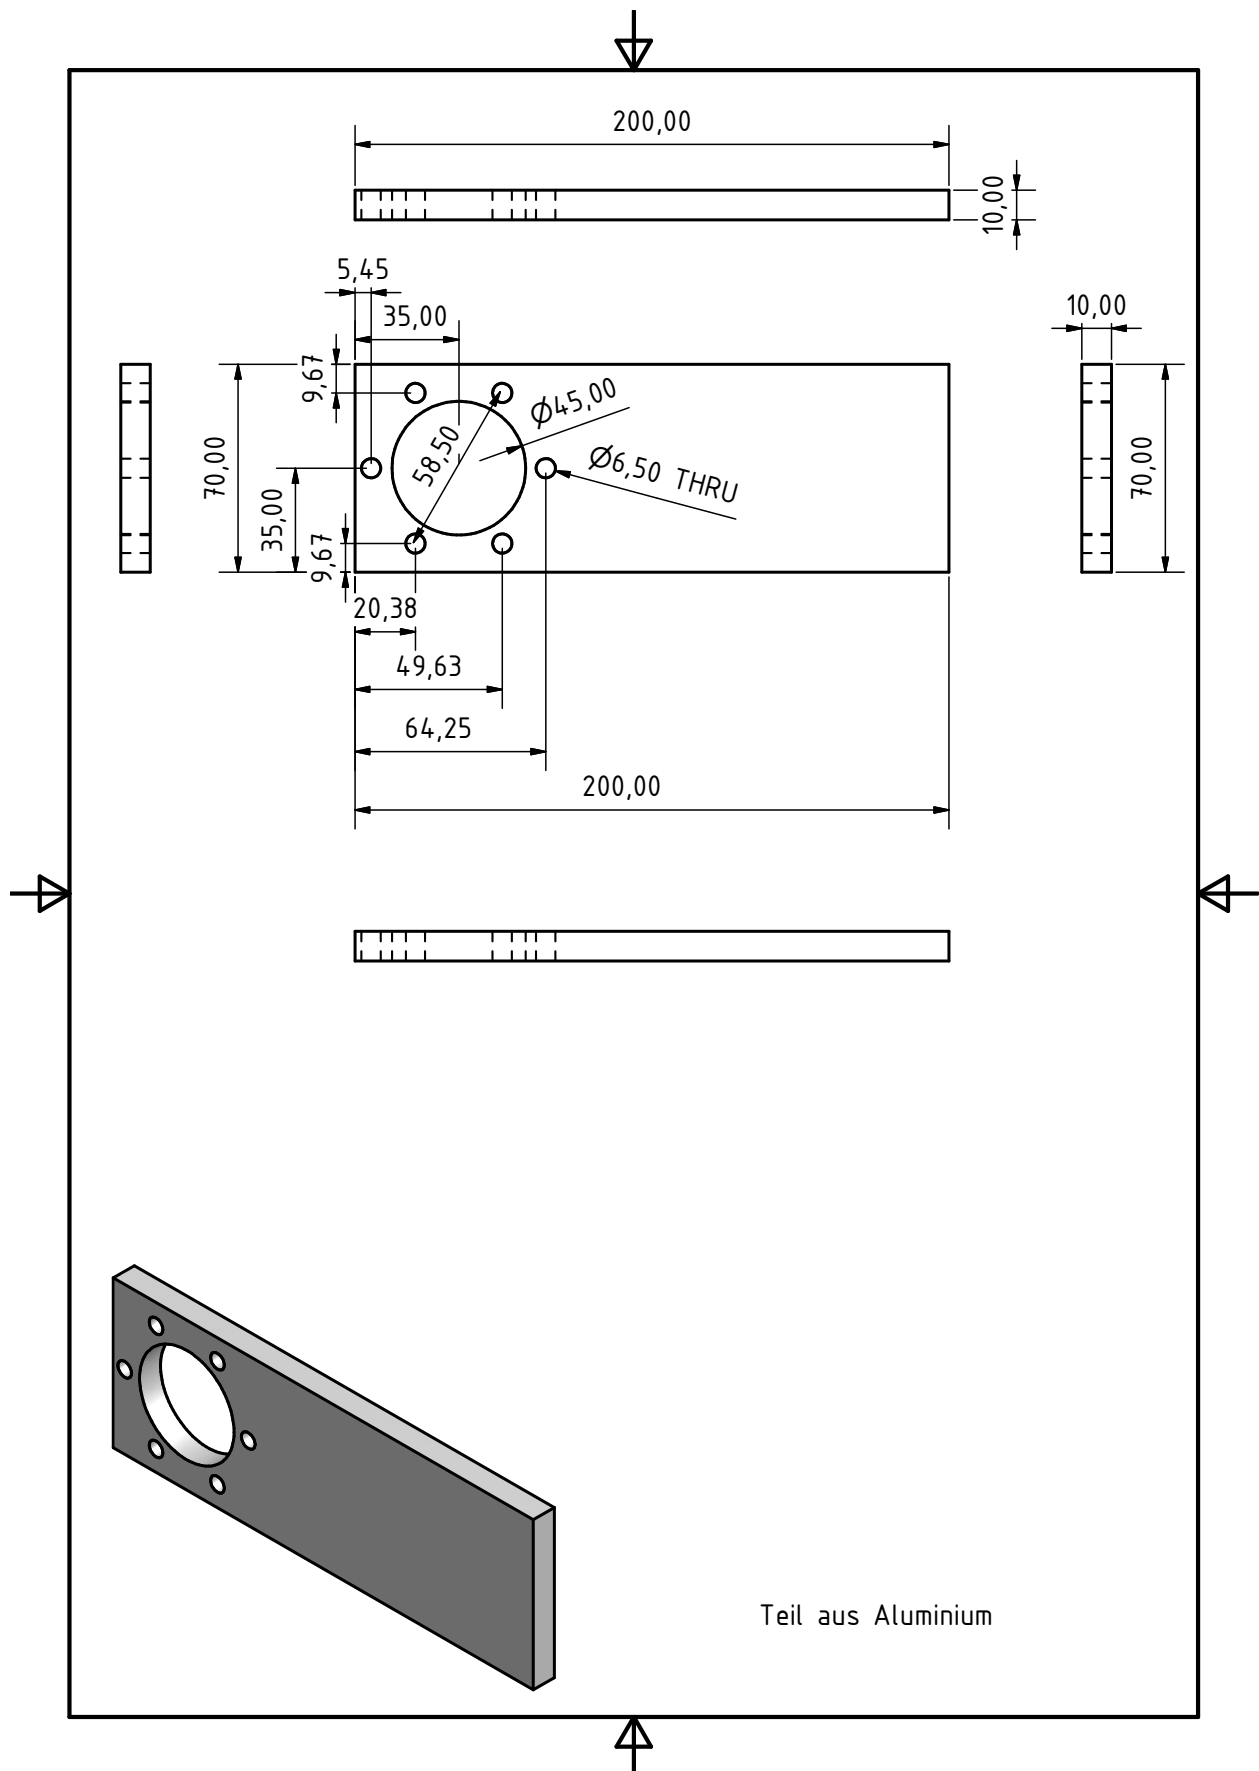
CAD sketch of detector to CF40 flange mounting part.
